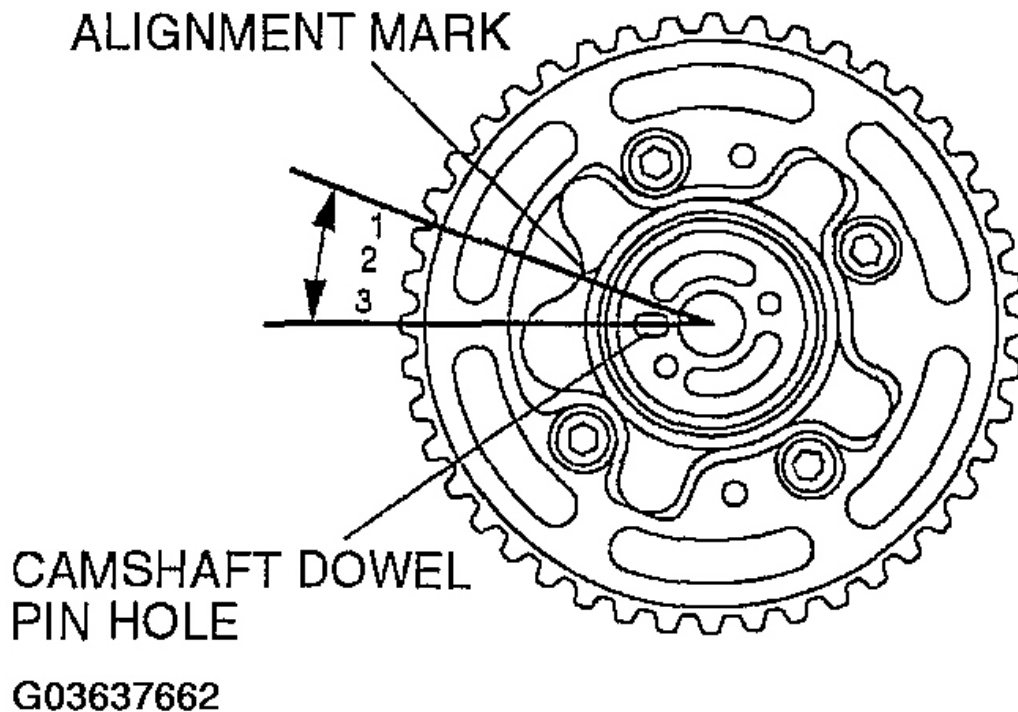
Identifying Camshaft Dowel Pin Hole Alignment Mark
